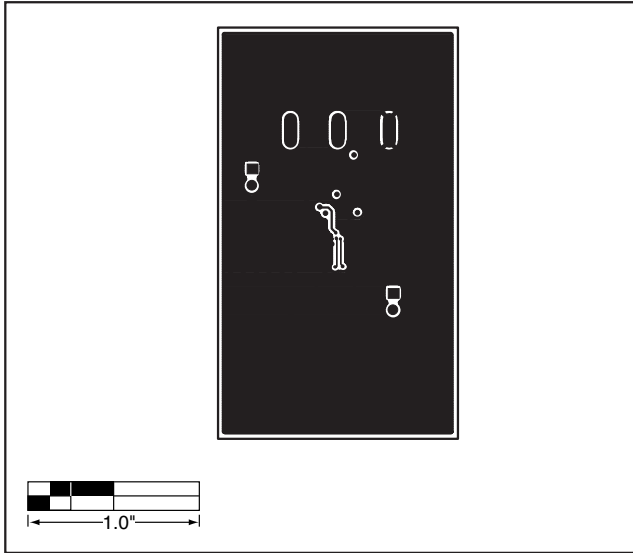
MAX2307 EV Kit PC Board Layout—GND2
